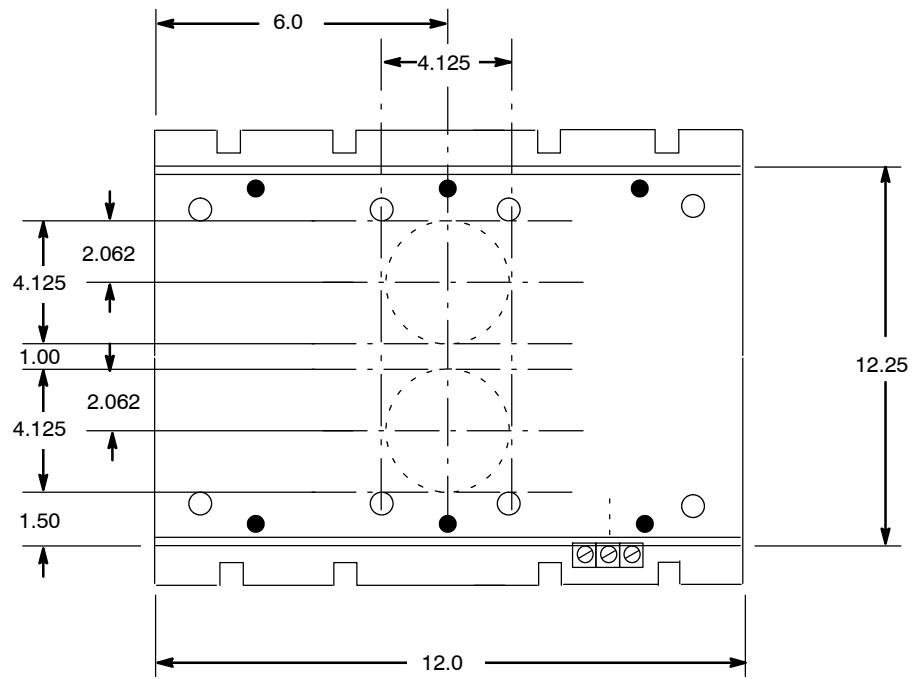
Dimensions to Locate Optional Fan Holes on CPM Two-Position Mounting Plate
